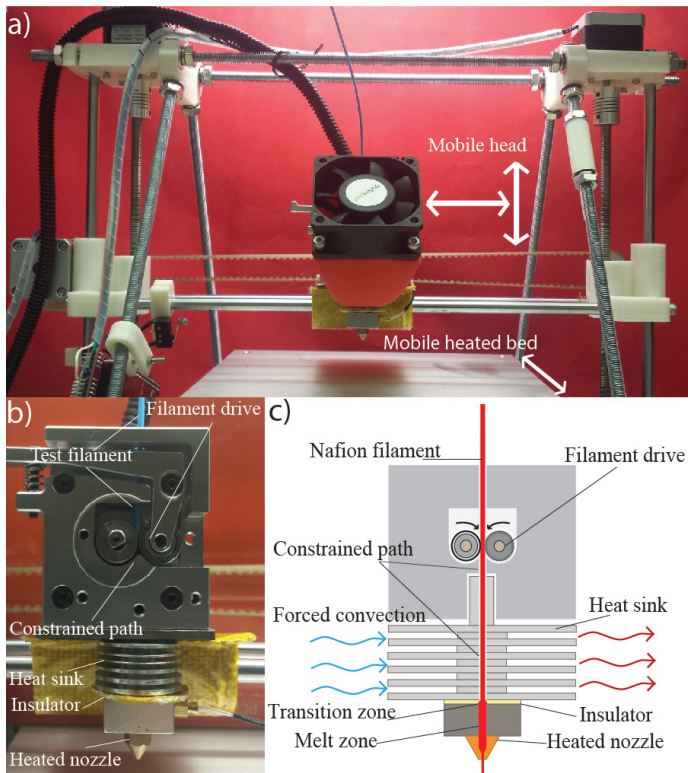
Custom-designed Nafion fused filament three dimensional printer: (a) Photo of the custom Nafion printer assembly, (b) Photo of the printer head and (c) Illustration of the printer head showing the main components.
